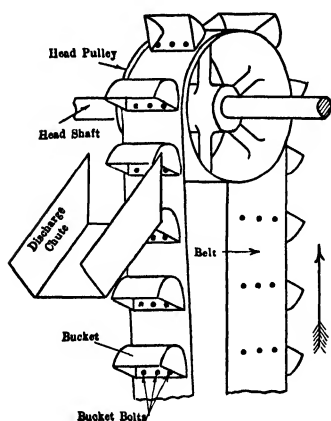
Head of Centrifugal Discharge Belt Elevator.
